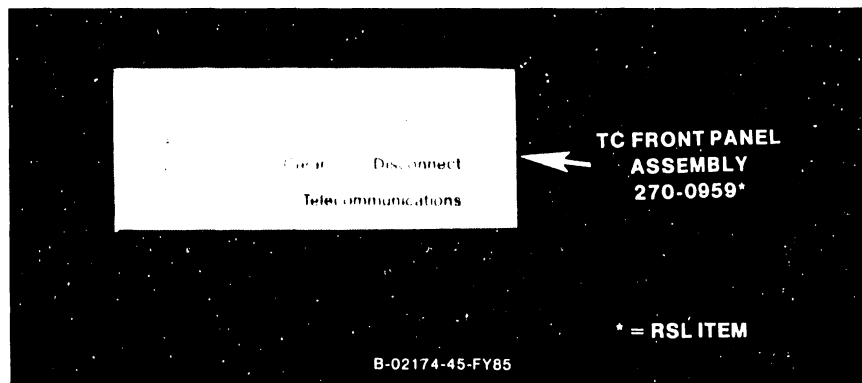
Telecommunication Control and Indicator Front Panel Assembly
